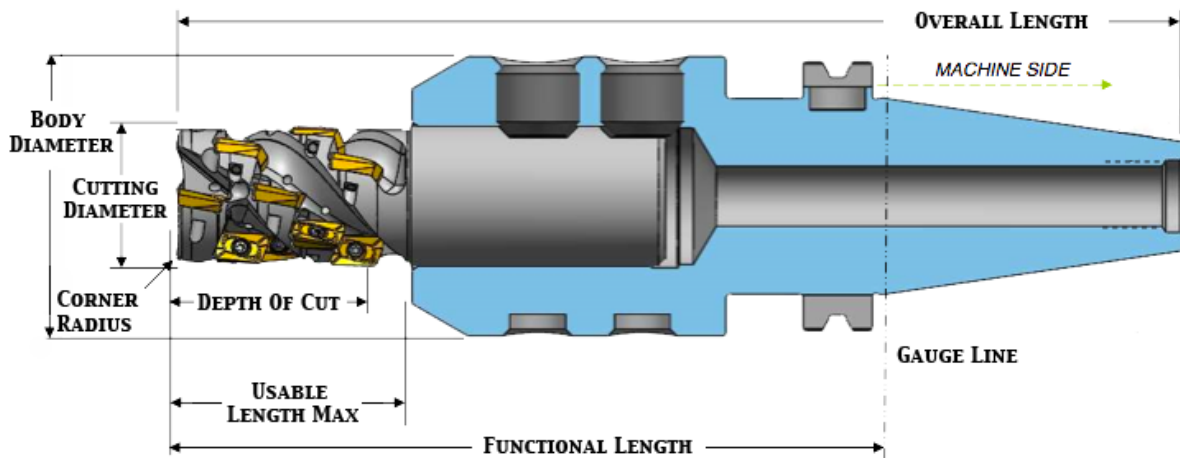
Cutting Tool, Tool Item and Cutting Item
